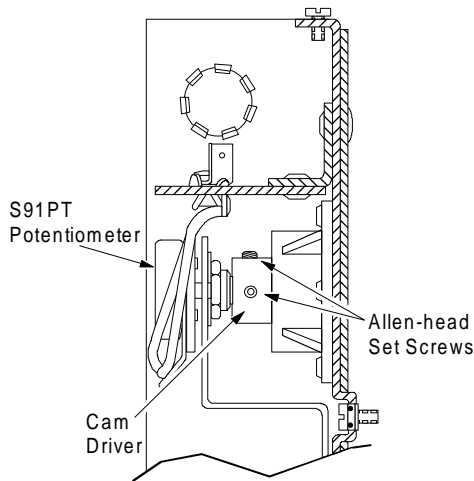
Mounting the S91PT to a M120, M140, or M150 Motor Actuator
